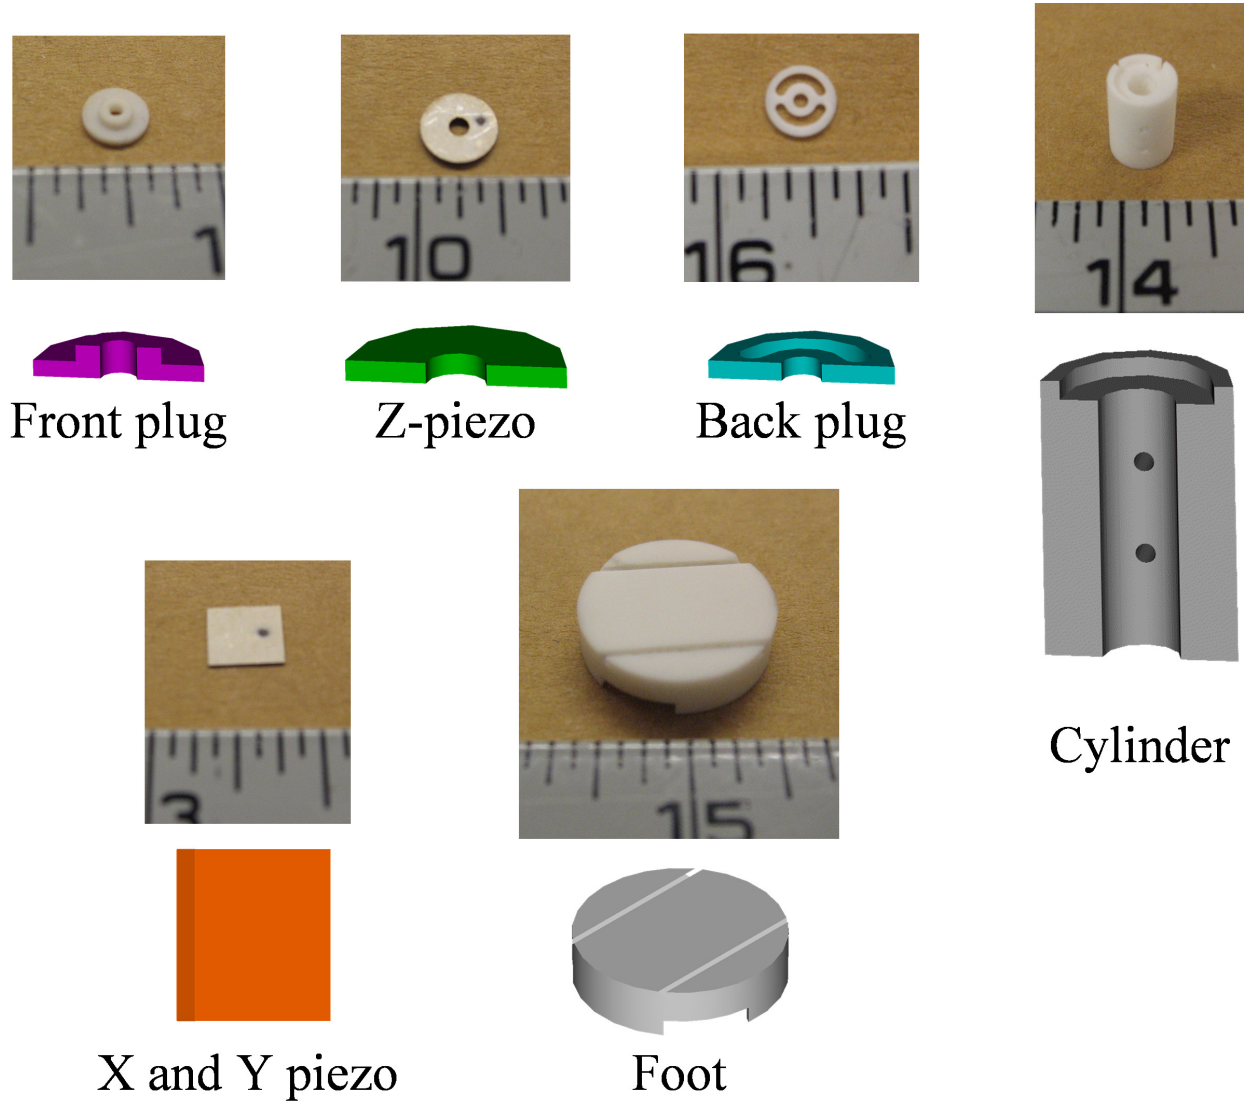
AutoCAD drawings and photos of the various bug parts. The top row of bug parts have cross-sectional views for the AutoCAD drawings, while the the AutoCAD drawings for the bottom two bug parts are not cross-sectional views. The dots on the piezos in the photos marks their + side. The ruler in all photos is in inches with 1/16" divisions.
